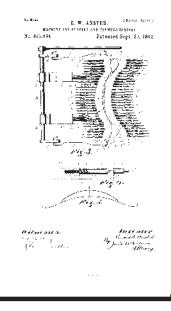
Machine for Bending and Forming Springs. An early example of a Mechanically Reconfigurable Mold
